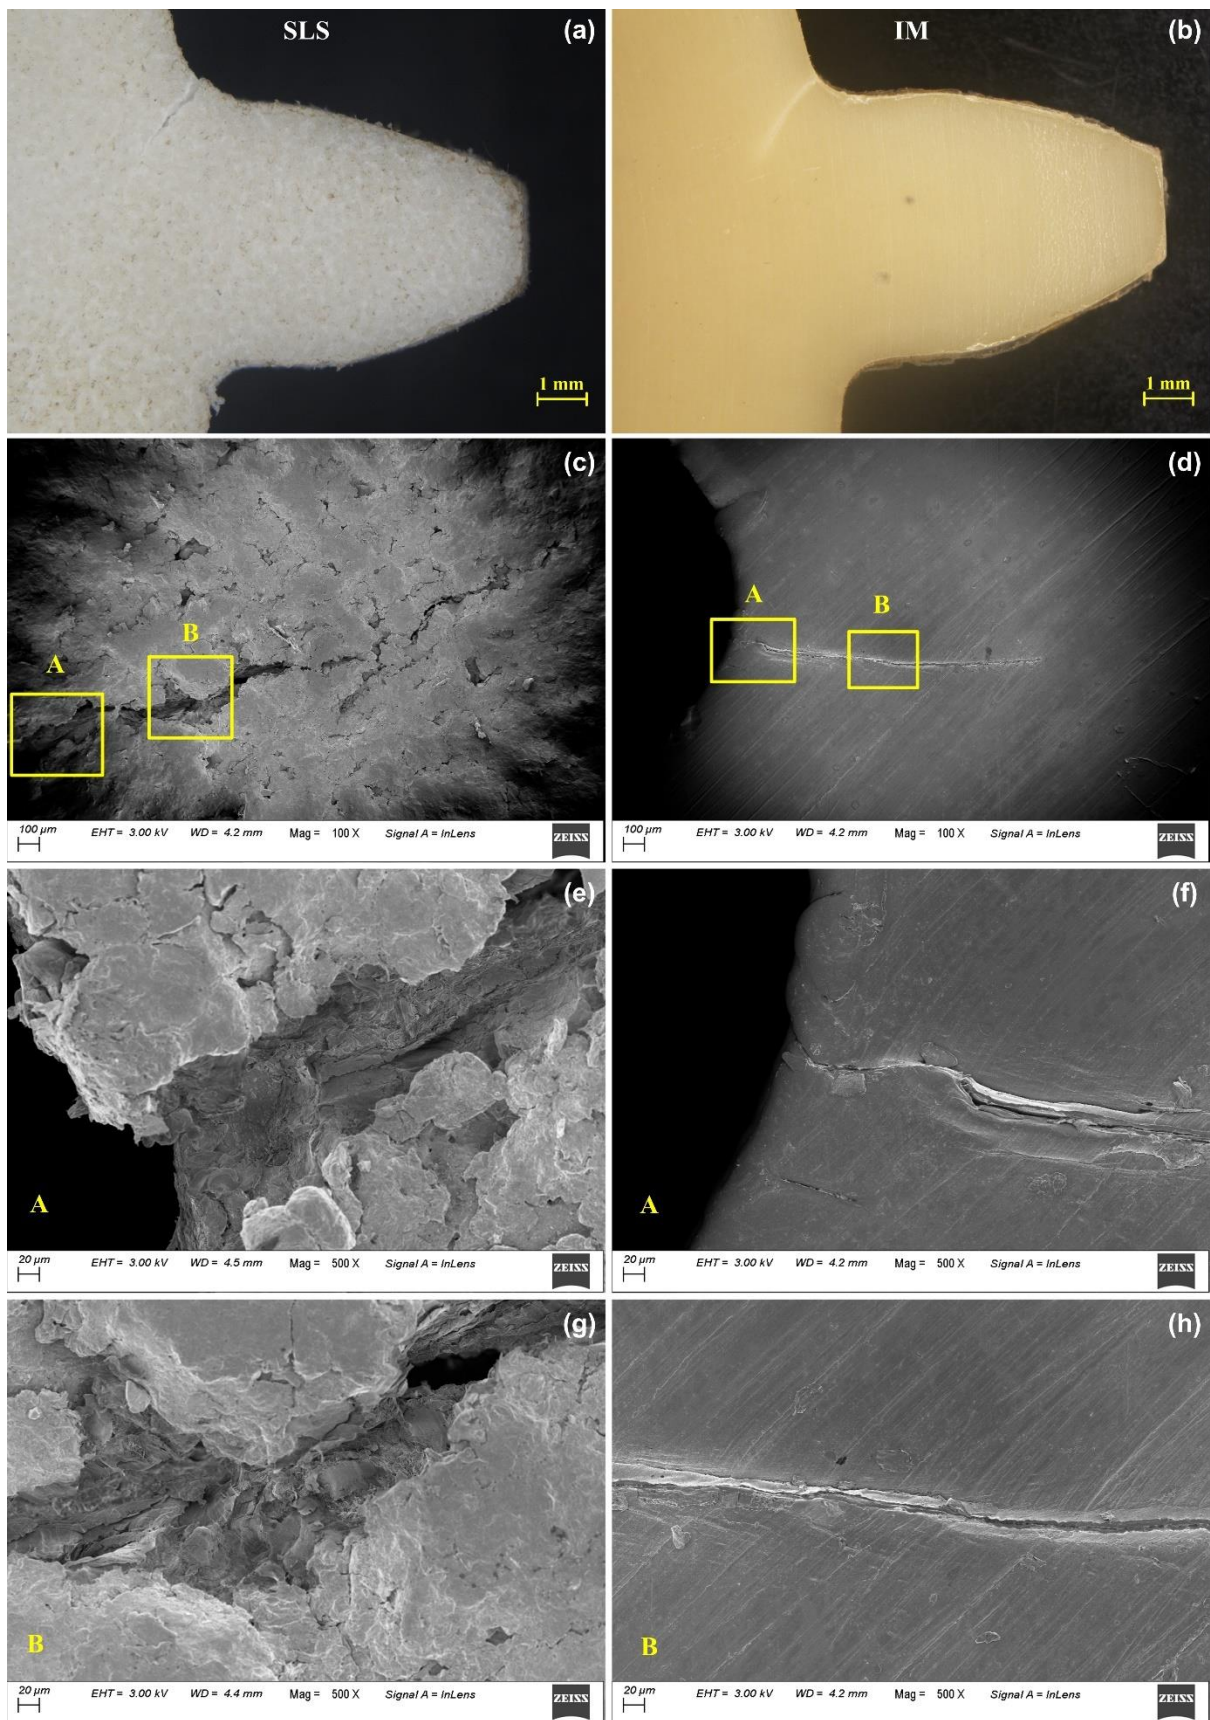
Failure zone images of test gears loaded at 8 Nm: (a, c, e, g) selective laser sintered gear built in ‘flat’ configuration and (b, d, f, h) injection-molded gear.
